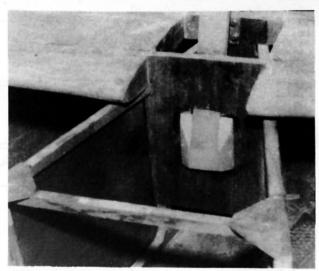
Plywood web attaching forward spar and anchoring vertical fin front spar.
